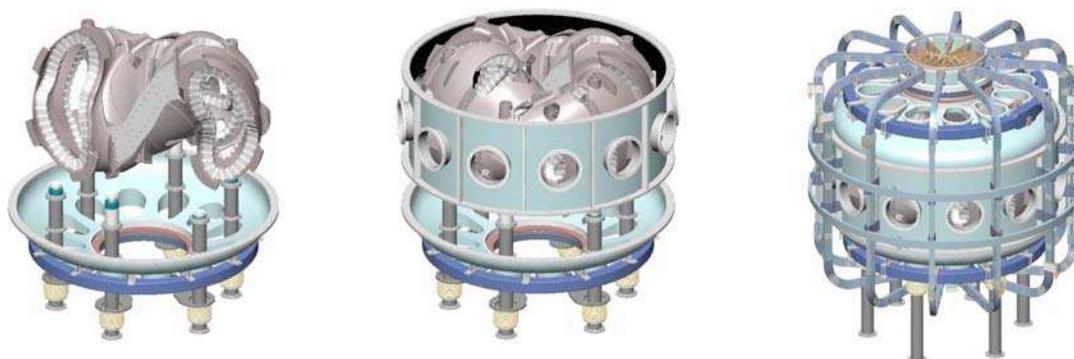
Assembly of the QPS stellarator coils in the vacuum tank.
